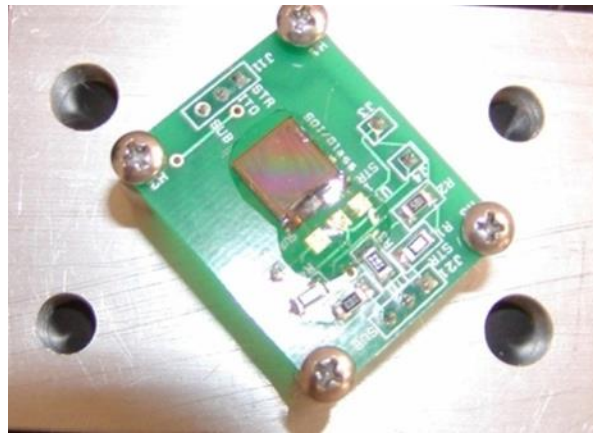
Aluminum plate to hold the SOI/glass chip PCB
